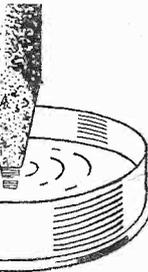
To tin the iron dip the point in non-corrosive soldering fluid after heating.
